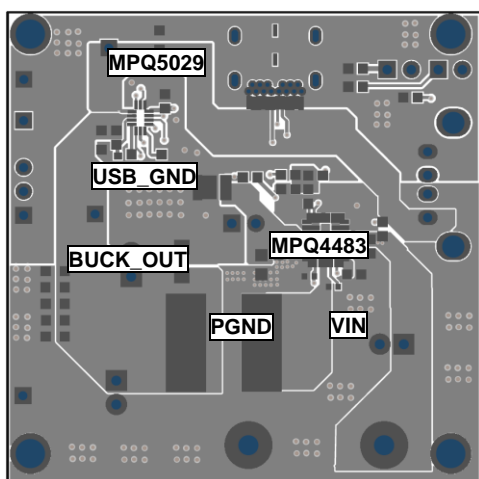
Recommended I/O Pins ESD Enhancing PCB Layout Guidelines ⁽⁹⁾
